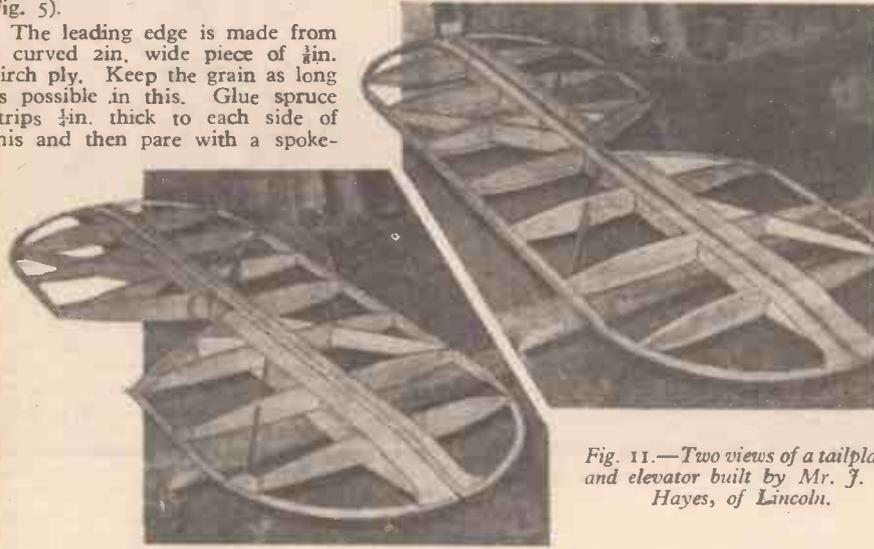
Two views of a tailplane and elevator built by Mr. J. T. Hayes, of Lincoln.
